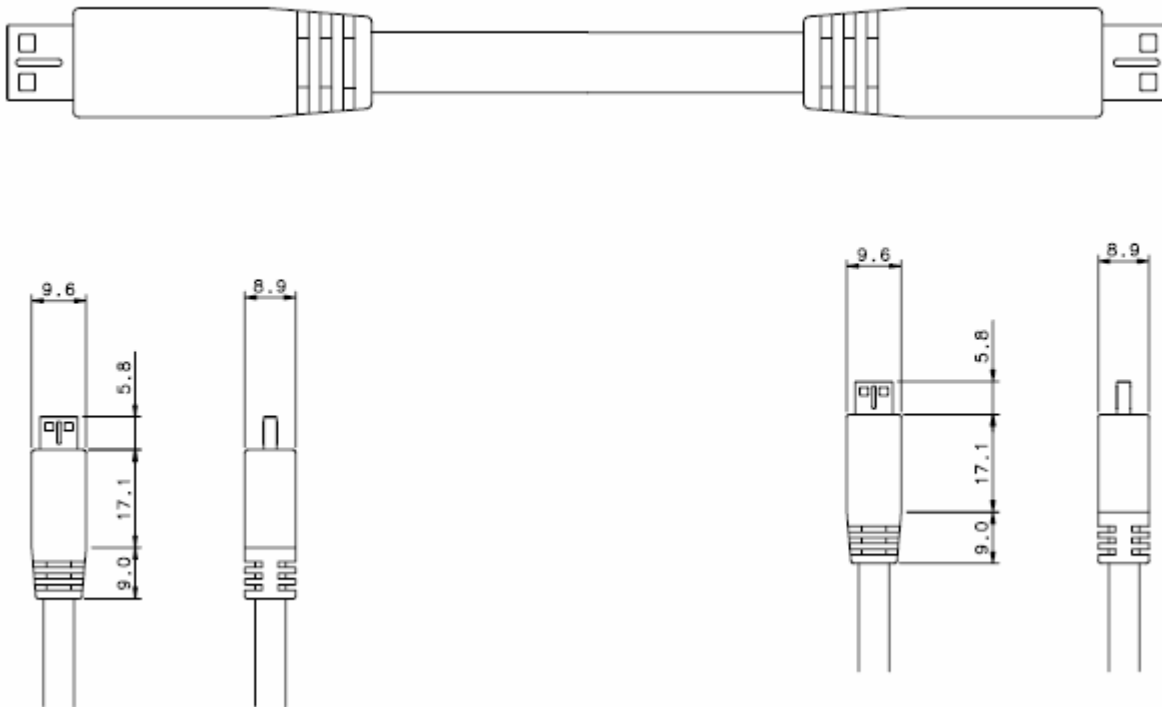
USB 3.0 Micro-A to USB 3.0 Micro-B Cable Assembly
